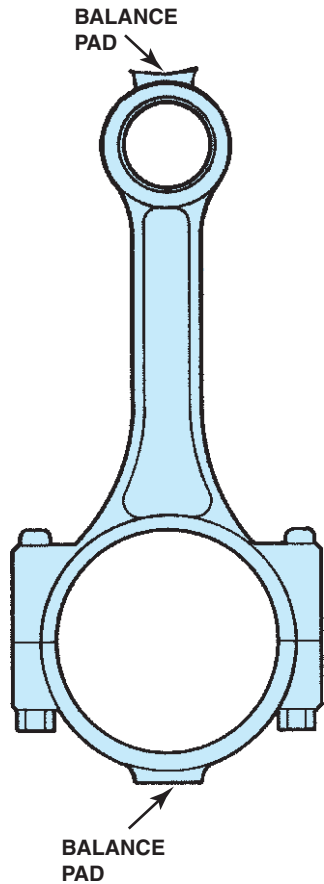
Some rods have balance pads on each end of the connecting rod.
